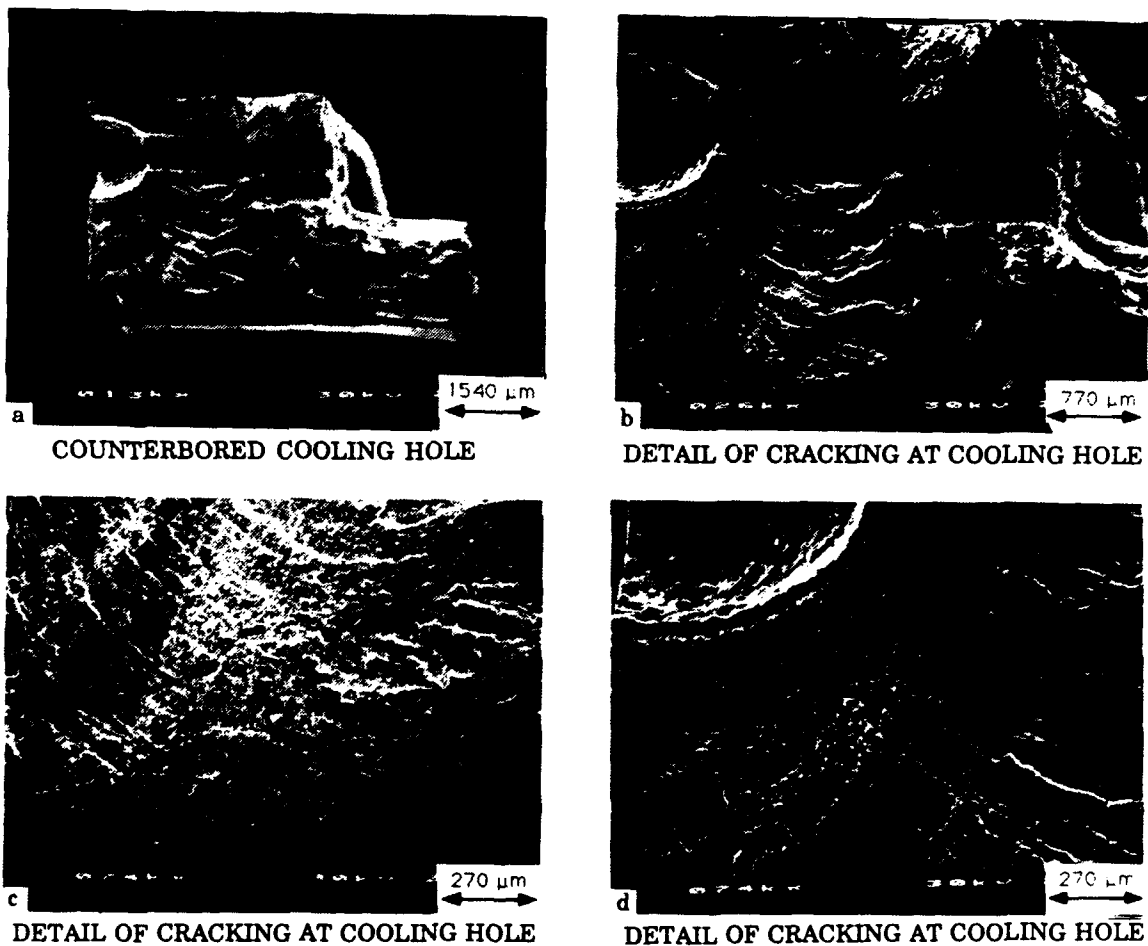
Fractographs of a crack in a DS-R80H HPT blade, ASMET engine tested, MERL 72 tip repaired by Chromalloy with counterbored tip cooling holes before engine test.
